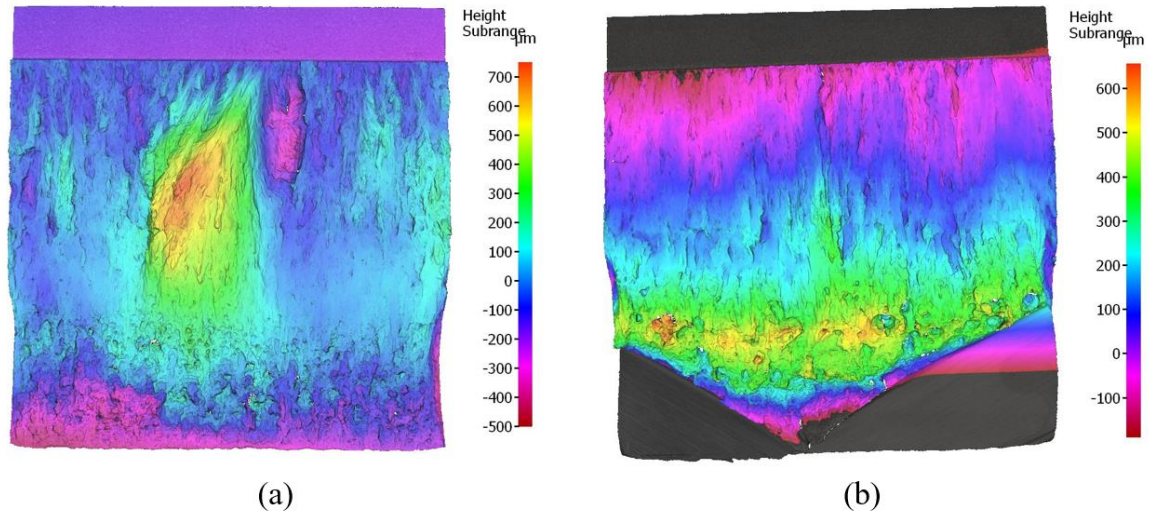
Roughness map of fracture surfaces, long crack test with increasing ΔK in HTed bi layer specimen, a) propagation from 316L top layer to IN718 bottom layer (specimen N°2), b) from 316L top layer to IN718 bottom layer (specimen N°1)
